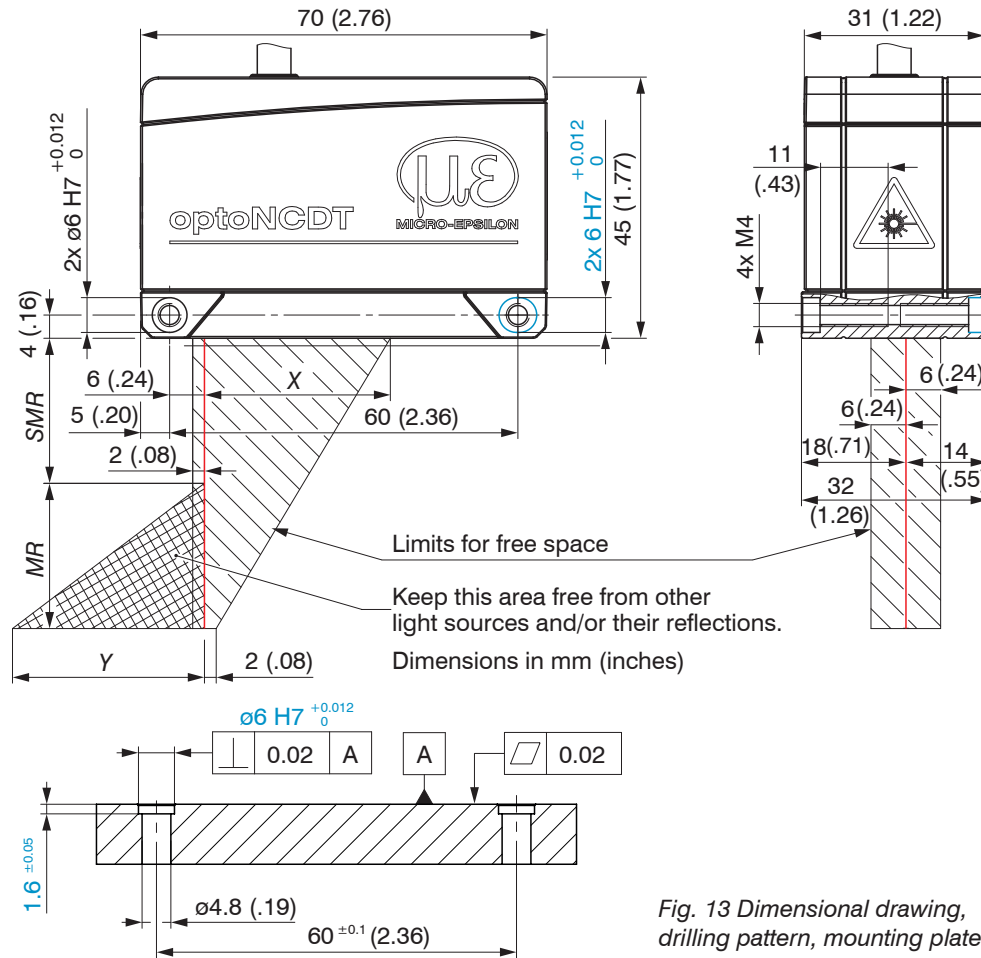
Dimensional drawing, drilling pattern, mounting plate
